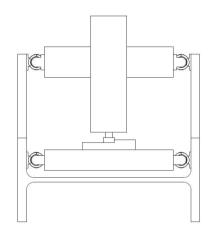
Bed structure with two movable cross-tables: top milling spindle; bottom workpiece holder
